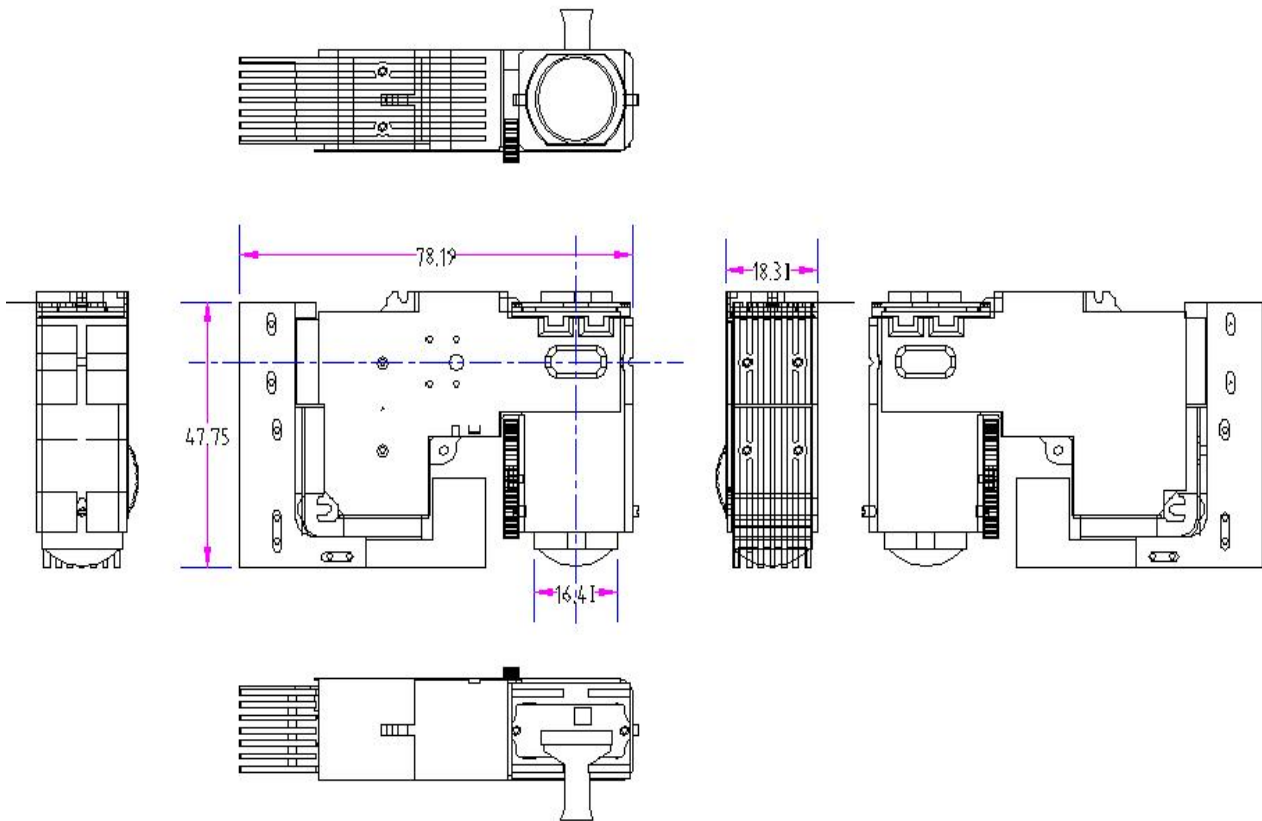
Mounting Dimensions for Module without LED Heat Sink System
